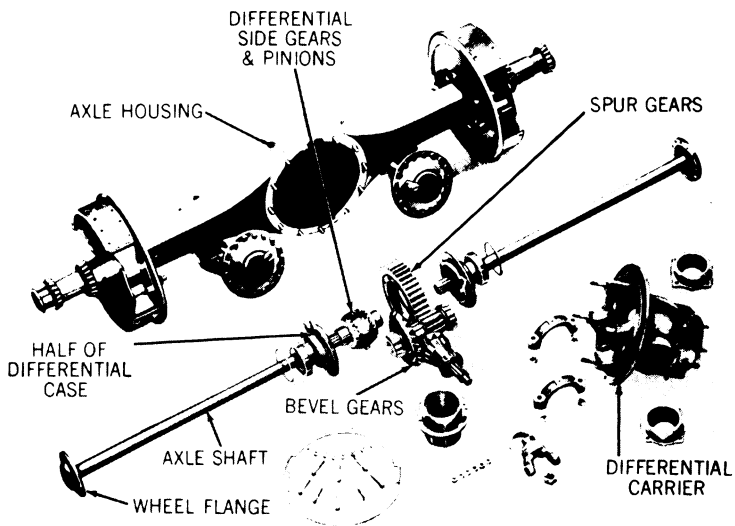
Gear Arrangement in Double Reduction Rear Axle.
